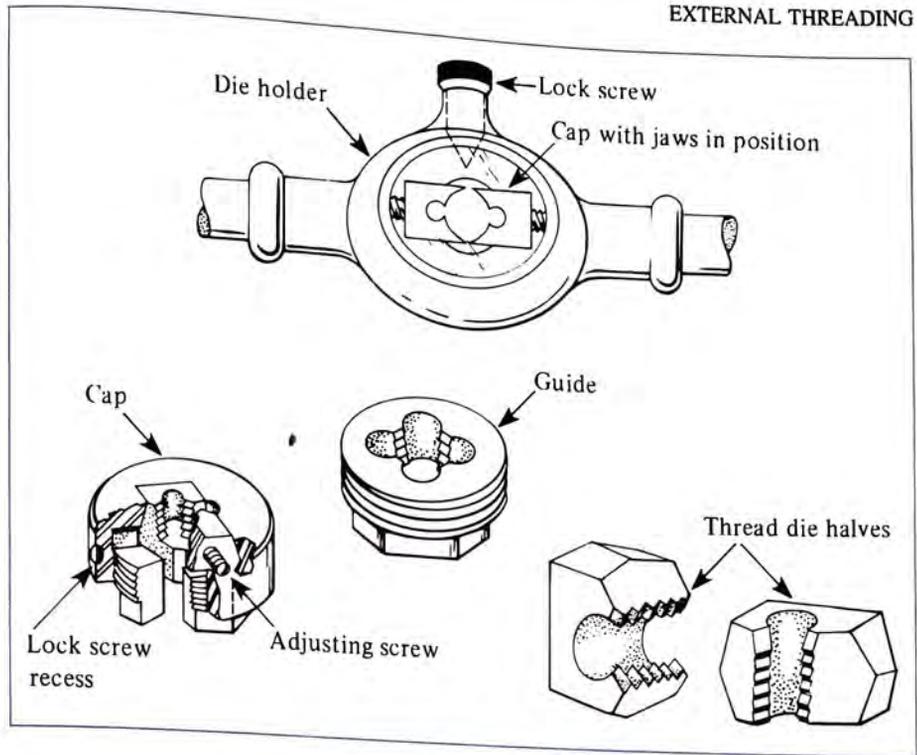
Features and Assembly of Die Halves, Guide, and Cap
